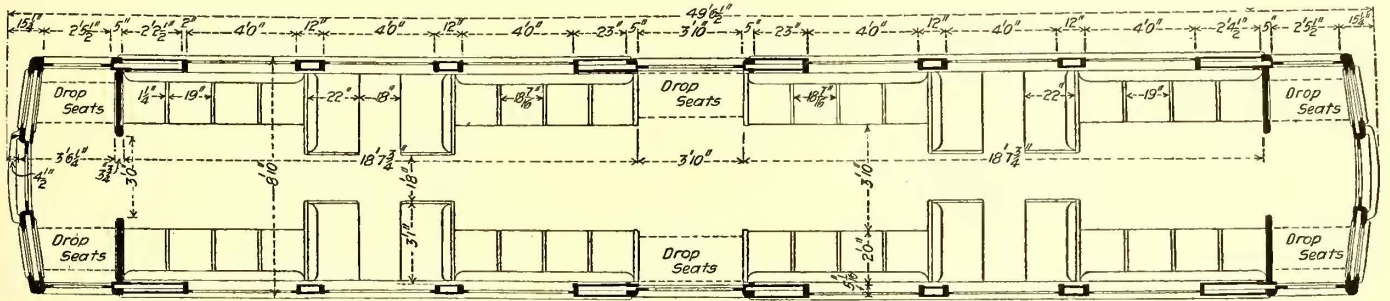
PLAN OF TRAIL CAR FOR THE LONDON UNDERGROUND DISTRICT RAILWAY
